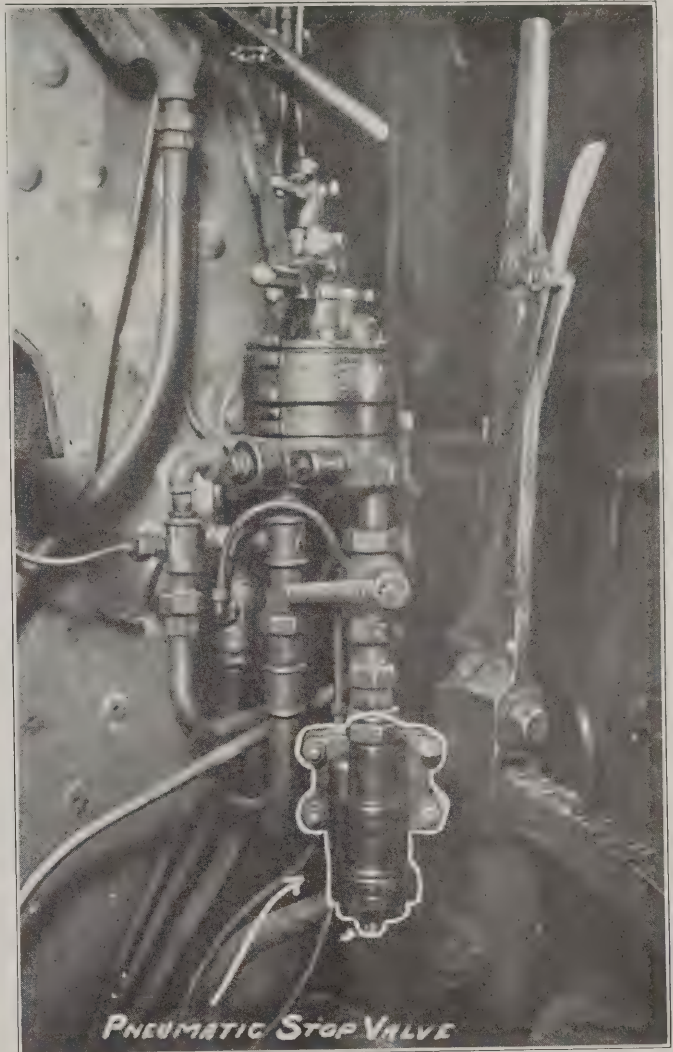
Pneumatic Stop Valve Attachment to Engine Equipment
